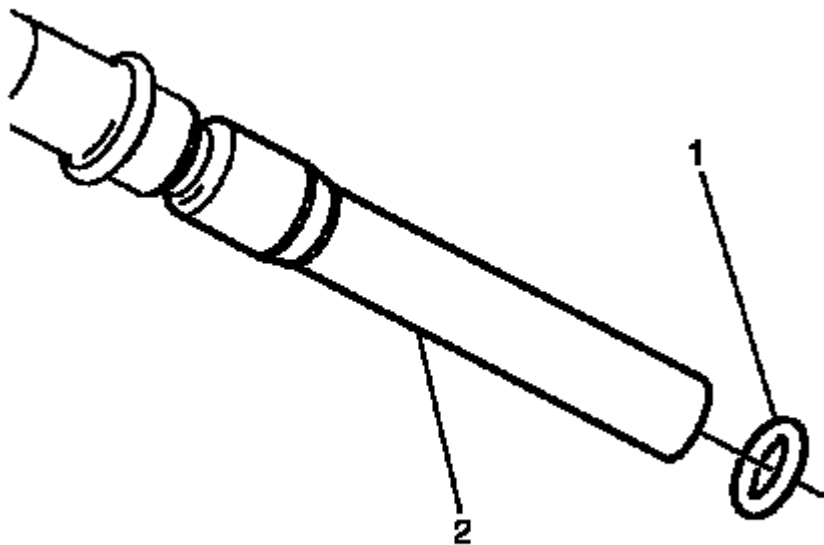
Identifying Oil Level Indicator Tube & O-Ring
